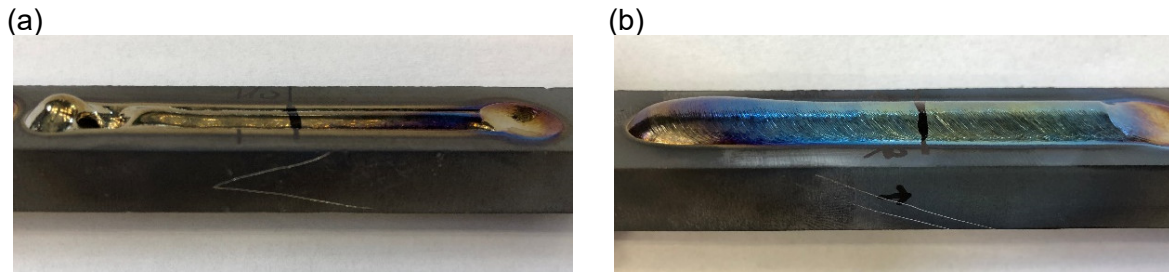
Weld seams (a) Preheating pass, and (b) preheating pass with a subsequent welding pass
